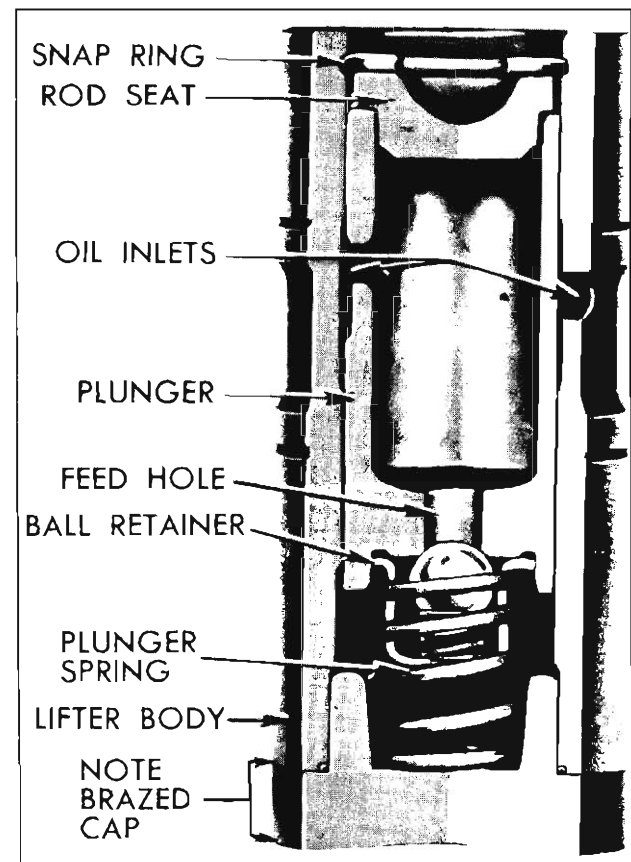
Hydraulic Valve Lifter Sectional View
